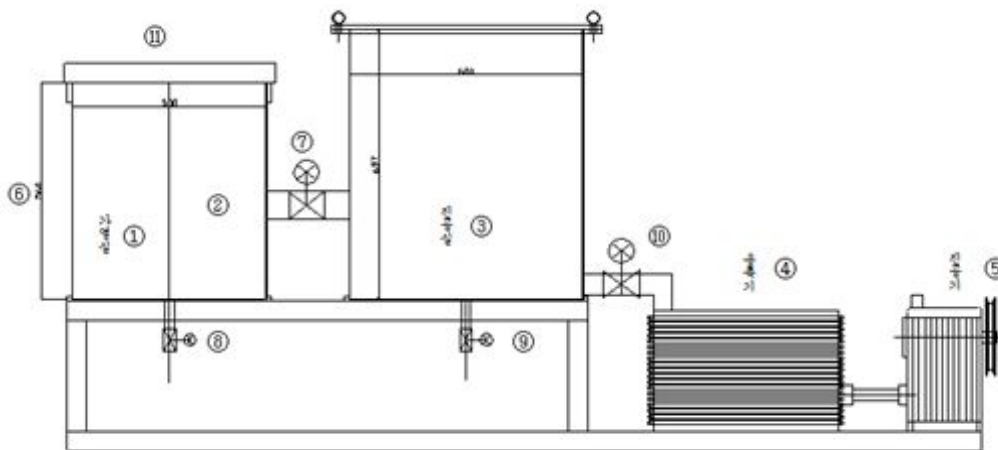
Assembly of non deep-fry vacuum puffing machine for Yukwa.
